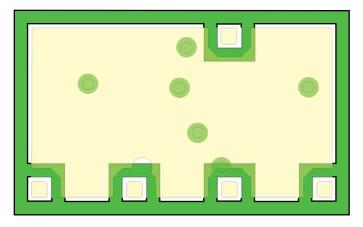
Solder Mask Superposed on ACFM-7325 Bottom Metal Pattern. (top view)
